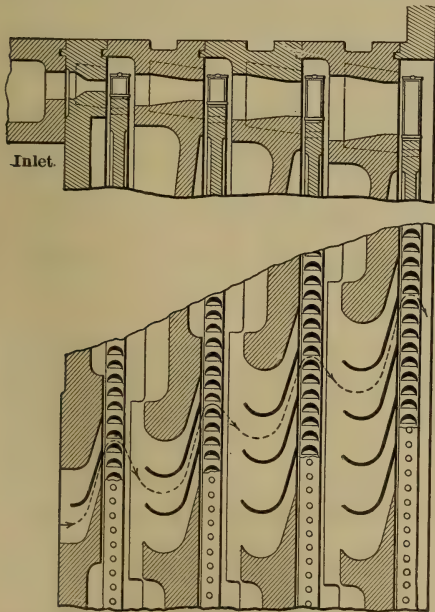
Arrangement of Vanes and Nozzles, Kerr Turbine.
